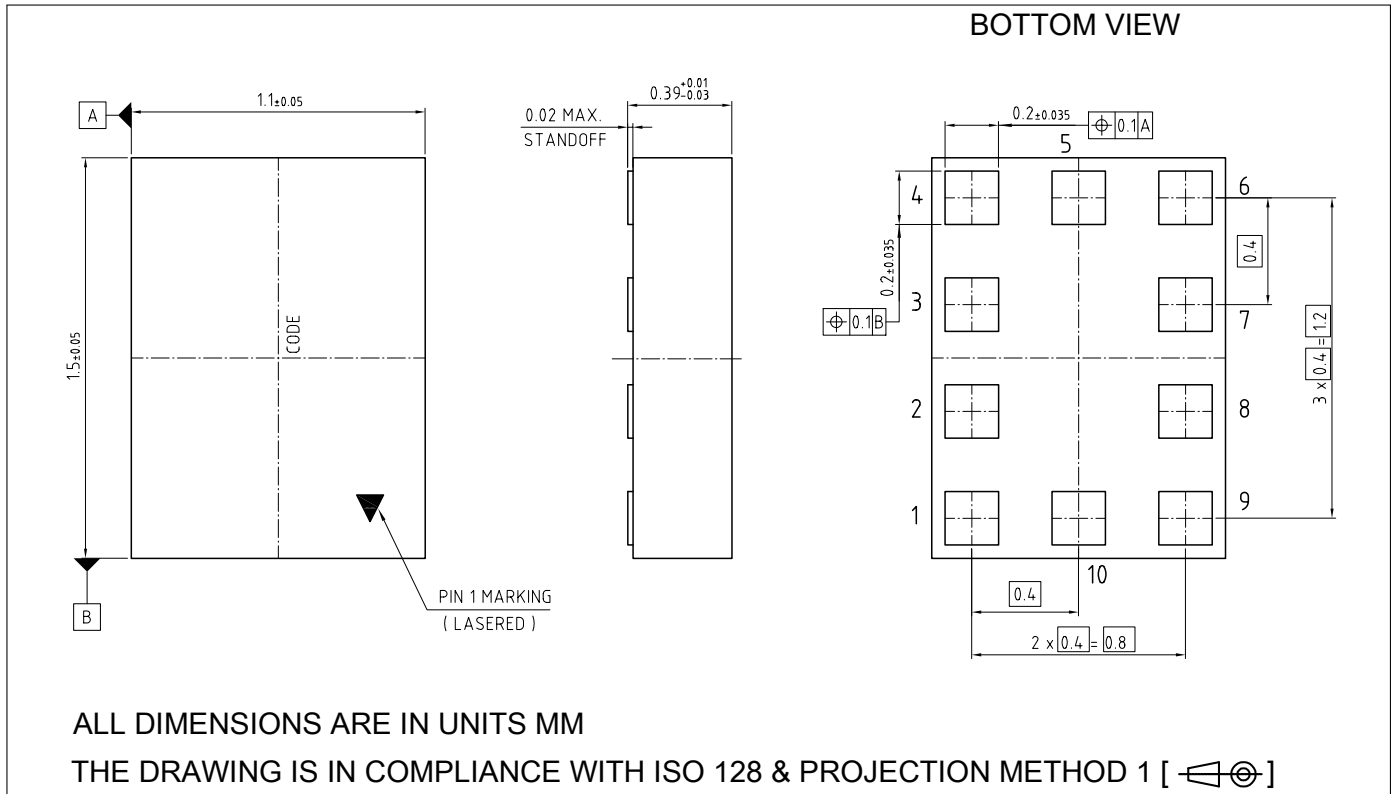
TSLP-10-3 Package Outline (top, side and bottom views)
